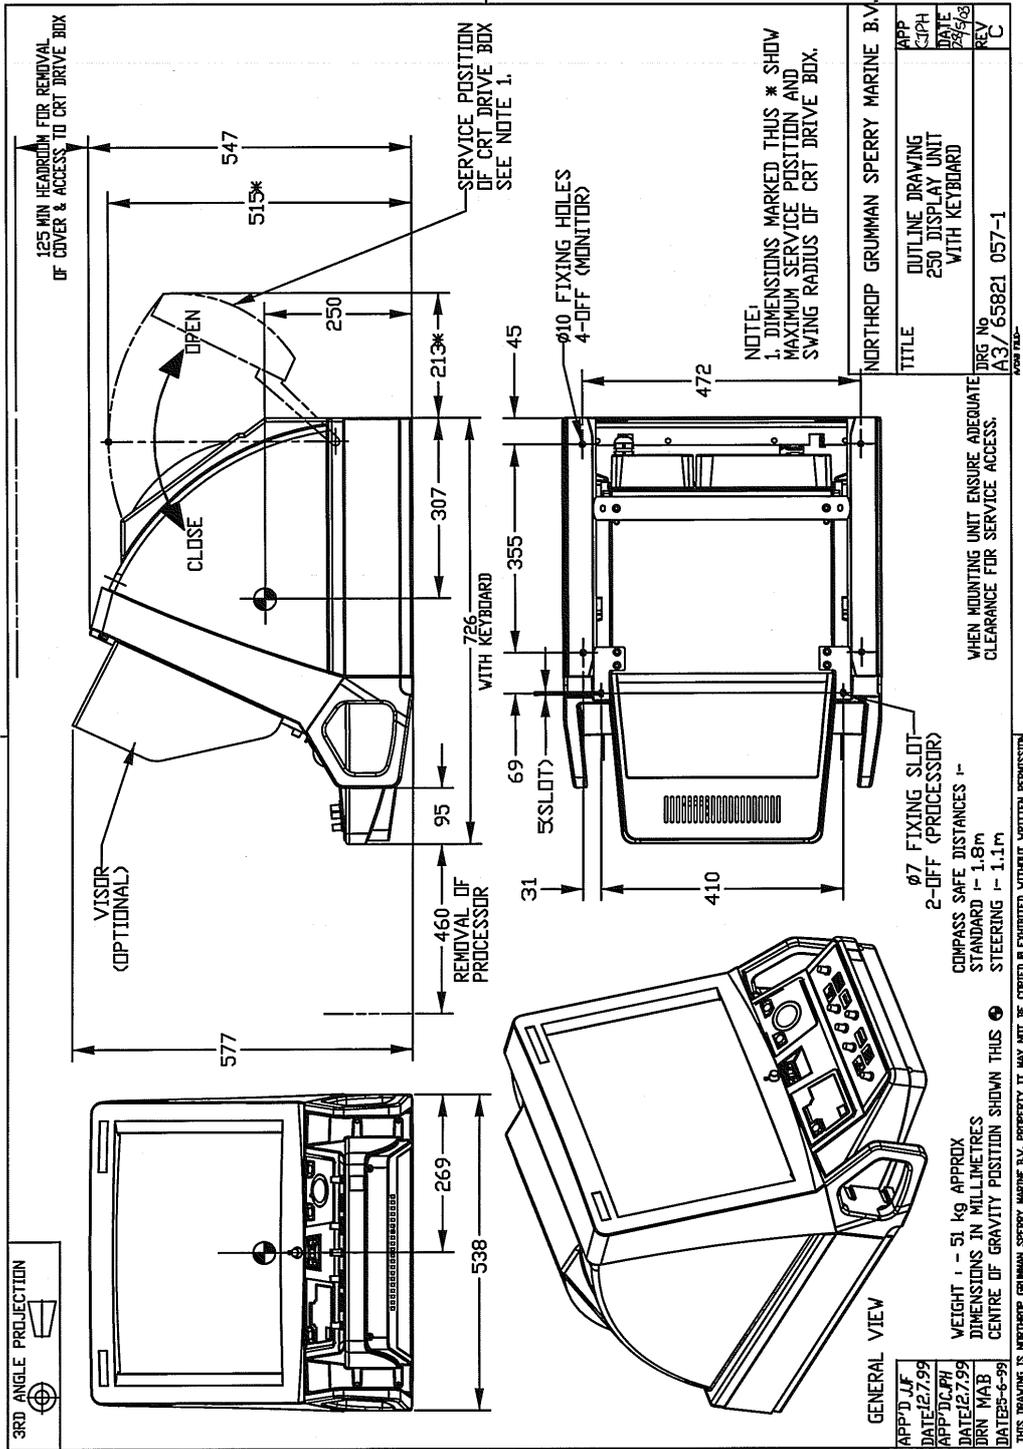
250 Display Unit (CRT with Keyboard) Outline Drawing
